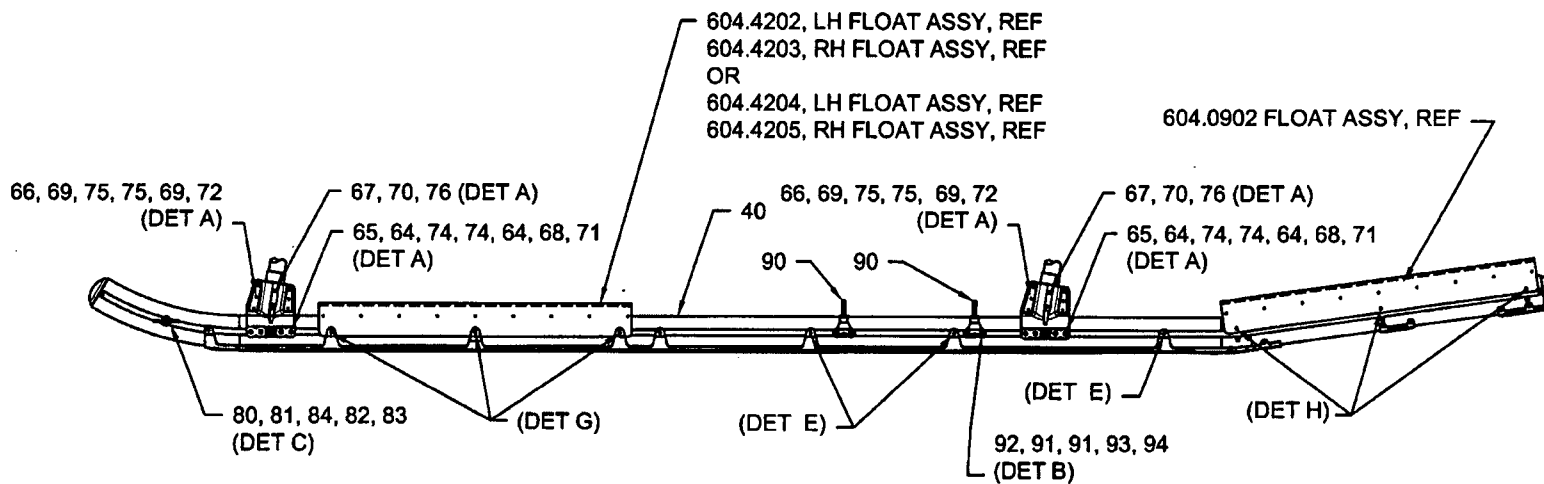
D119-646-213 FLOAT SKIDTUBE INSTALLATION WITH TRAINING WEARPLATES, LH (SHOWN)
